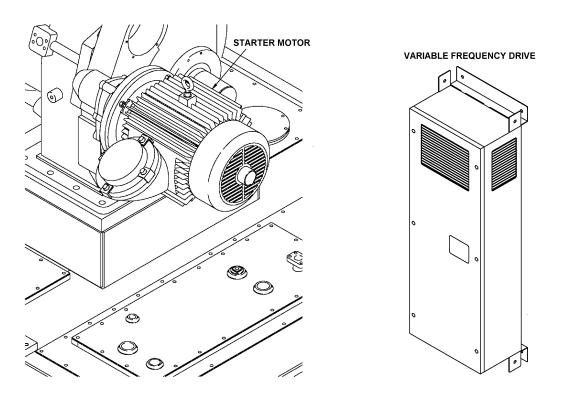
Direct-Drive AC Starter Motor and Variable Speed Drive
